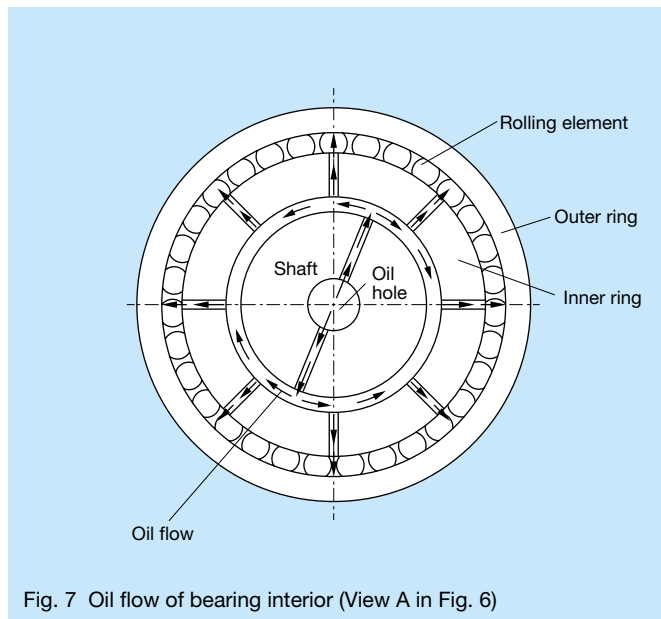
Oil flow of bearing interior (View A in Fig. 6)
